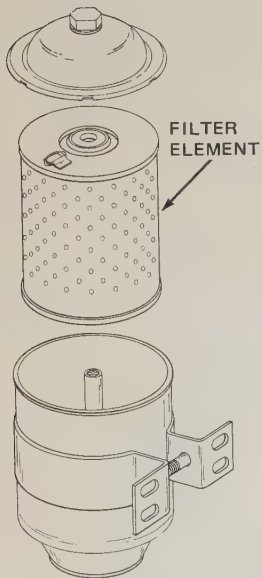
An oil filter using a replaceable filter element. (Kohler Company)
